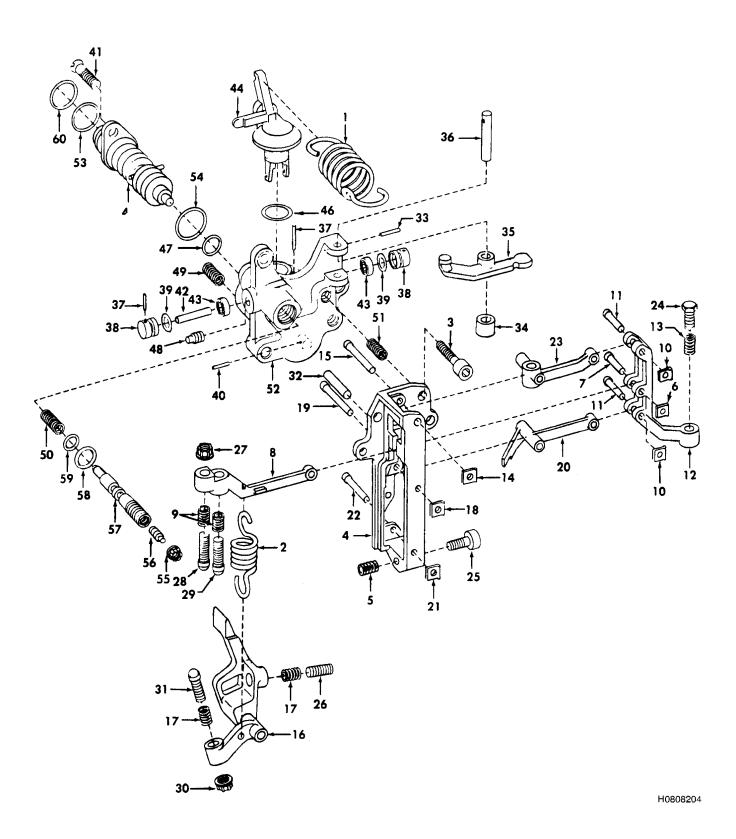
Linkage Assembly (Sheet 1 of 2)
